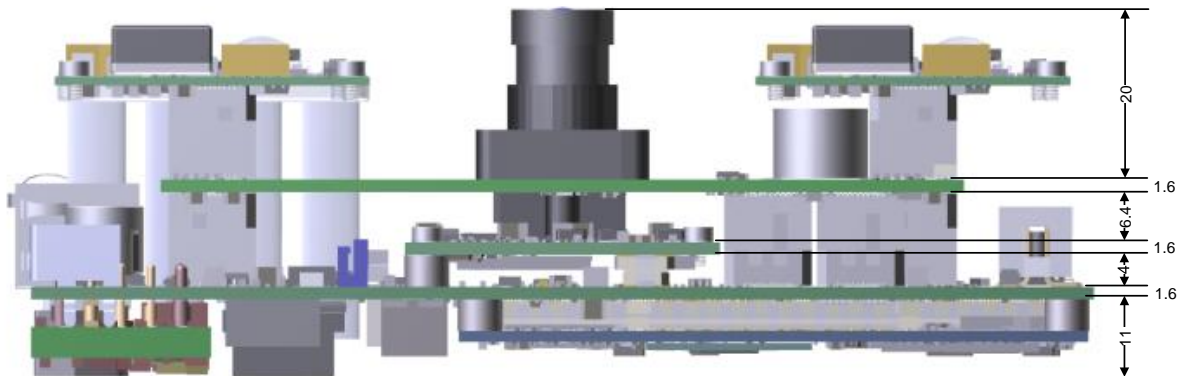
Side view of the Sentis3D-M530-Baseboard
